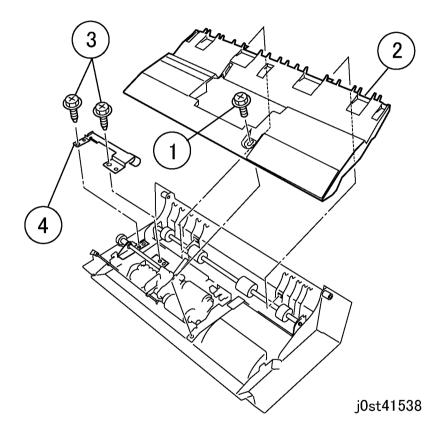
Removing the Feed Upper Chute and Plate Spring (j0st41538)
